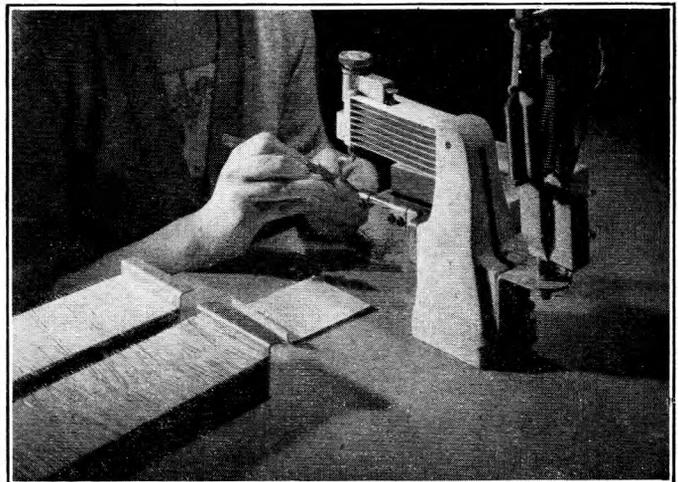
WELDING WIRES OF IA THERMISTOR TO A CUNIFE HAIRPIN.
